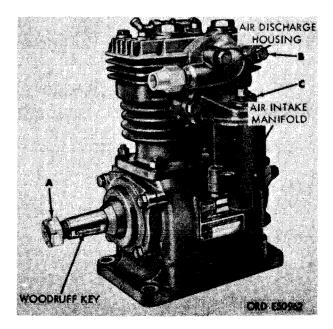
REMOVING OR INSTALLING AIR INTAKE MANIFOLD AND AIR DIS-CHARGE HOUSING FROM AIR COMPRESSOR ASSEMBLY.
